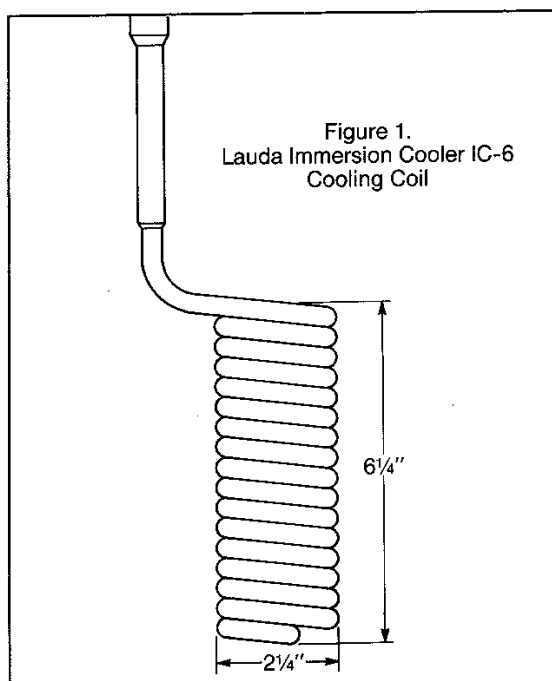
Lauda Immersion Cooler IC-6 Cooling Coil
